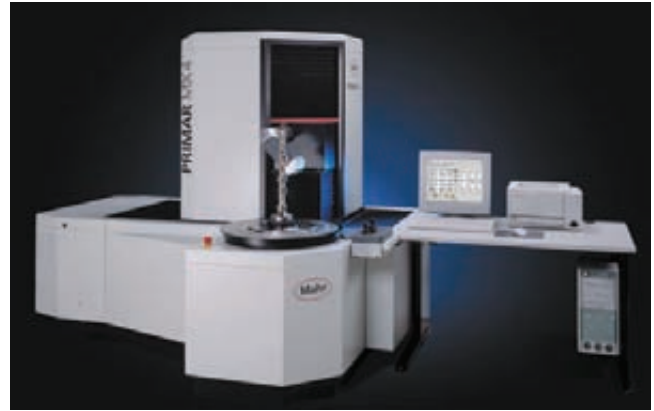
Electromechanical comparator inspecting a camshaft (Courtesy Mahr Federal Inc.).
